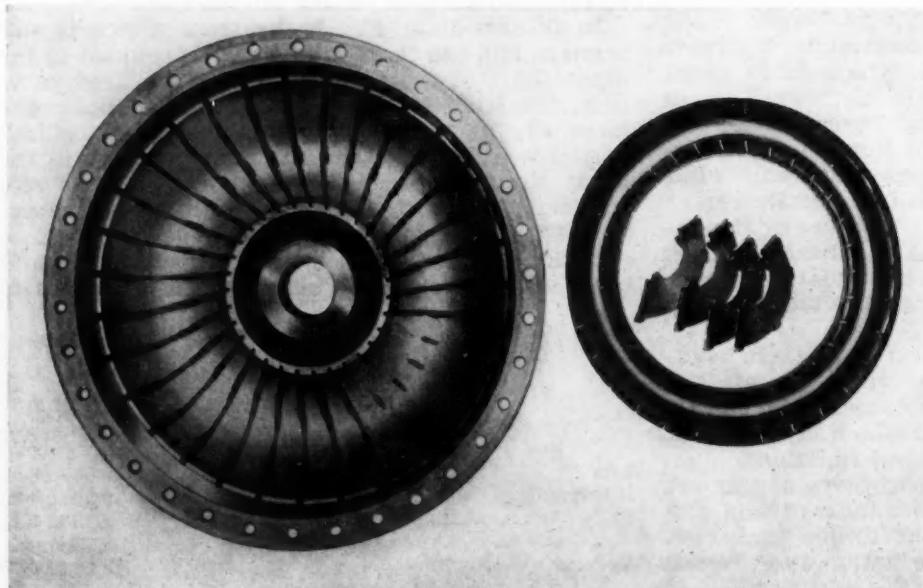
Stamped steel blades are used in the pump, shown here, as well as in the turbine. Tabs on the stamped blades, which are bent over after being assembled in place, help position and retain the blades in the assembly
